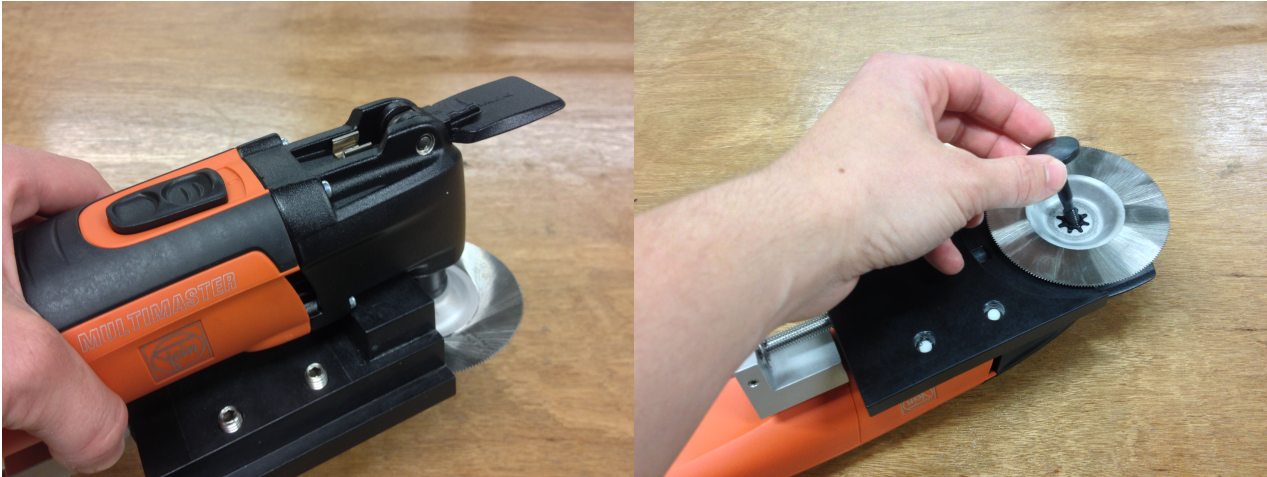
Removal of blade from FEIN MultiMaster cutter.
